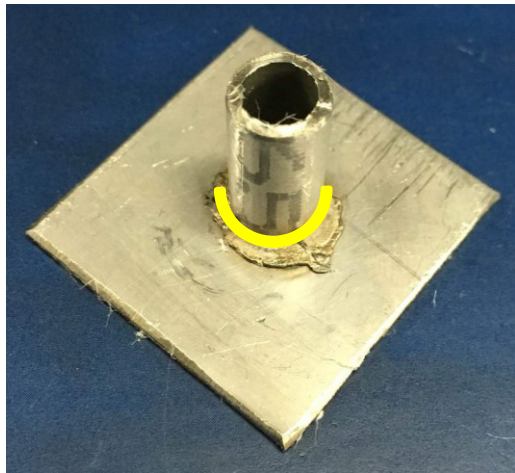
Appearance specimen after welding cross section observation method in the plane direction.
